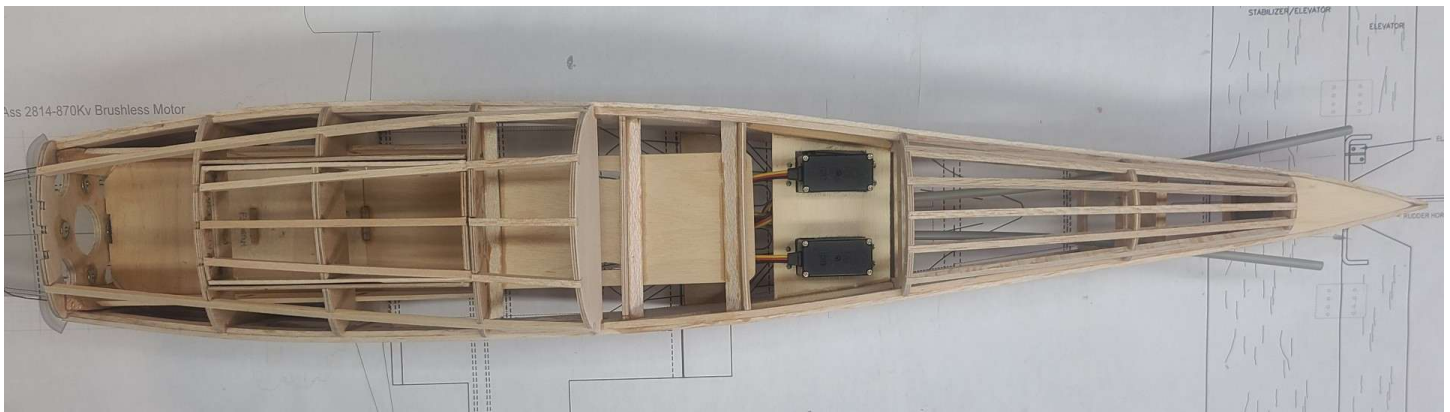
OA-1K Fuselage Assembly Top View (cont.)
